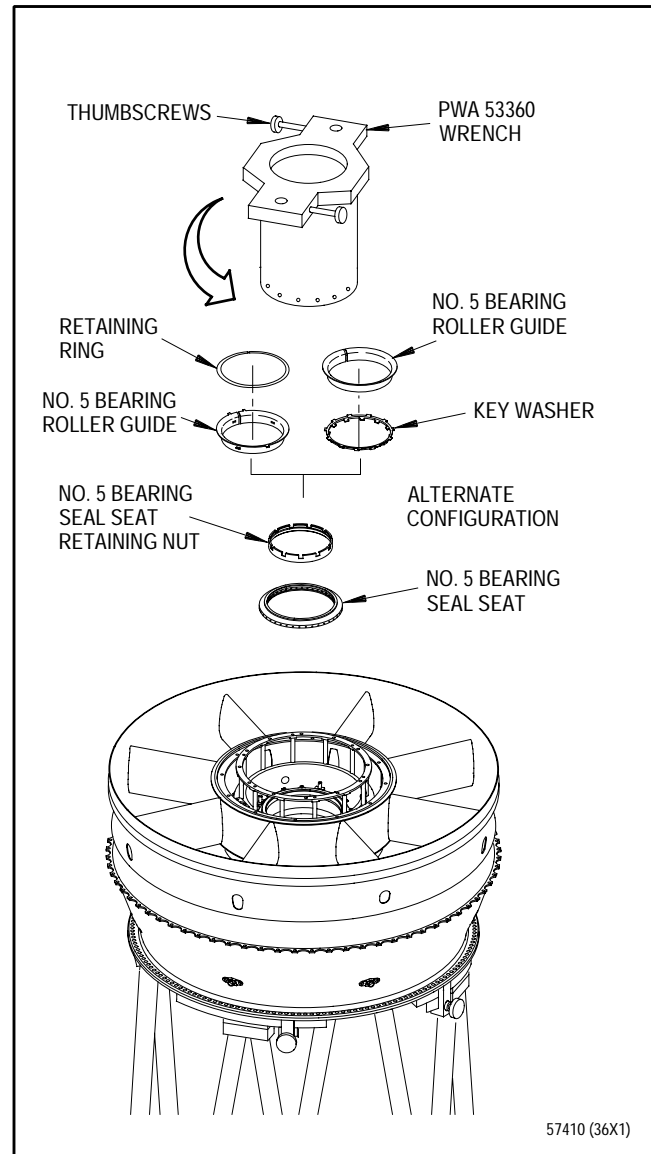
No. 5 Bearing Seal Seat Retaining Nut - Removal (Sheet 1 of 2)
